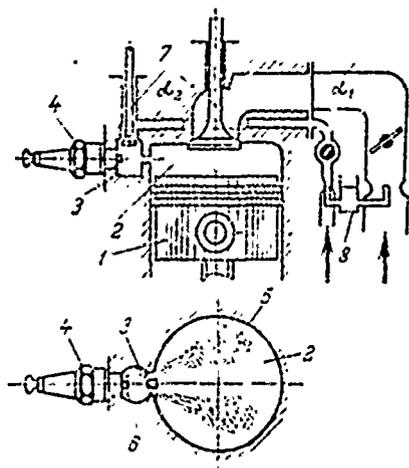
Schematic diagram of carburetor engine with prechamber burner ignition [22]:
